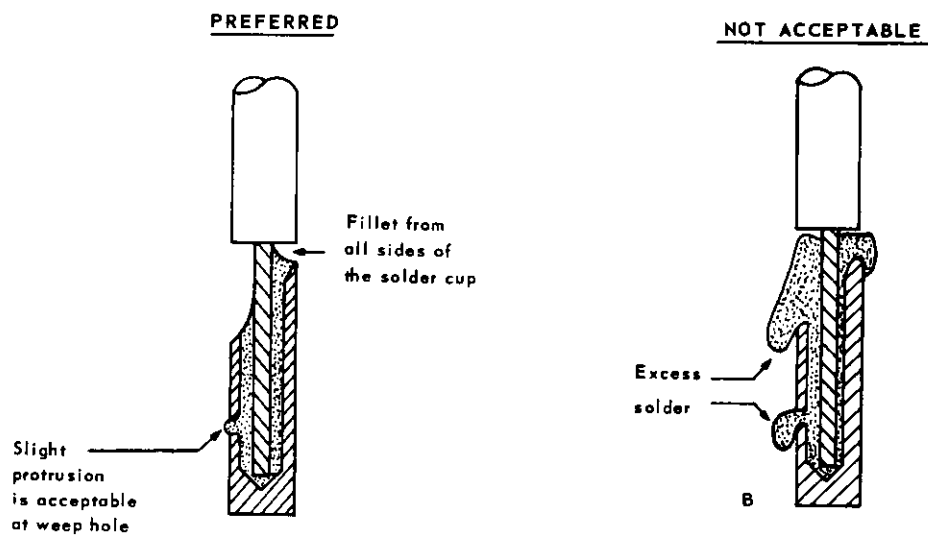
WIRE INSERTED IN TUBULAR TERMINAL WITH WEEP HOLE
